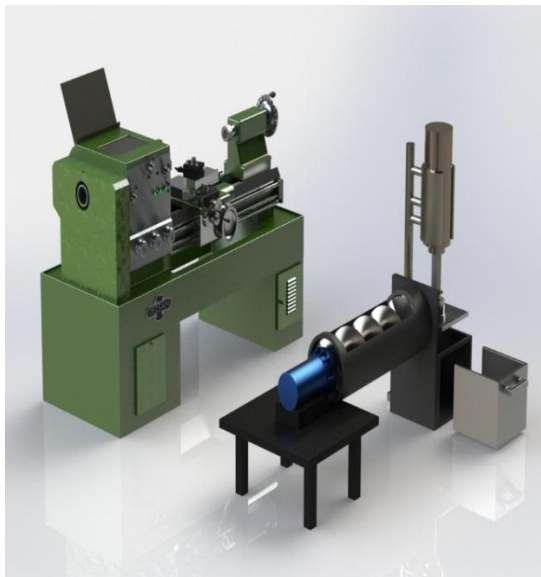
, Design of scrap bailing press with a conveyor is attached to a lathe as seen above-mentioned
